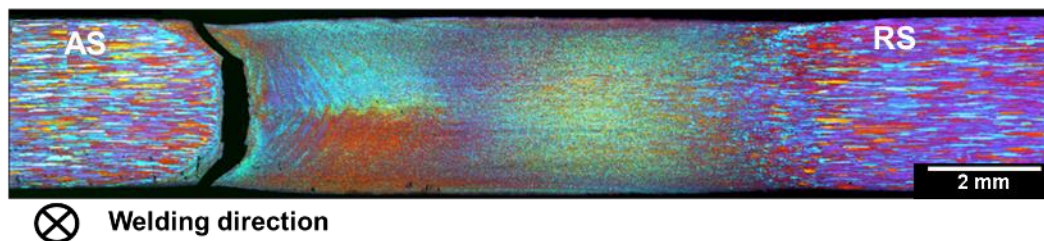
Fracture mode III location and shape observed by optical microscope in welding direction of AA2060 sample welded by SRBT-FSW LEW.
